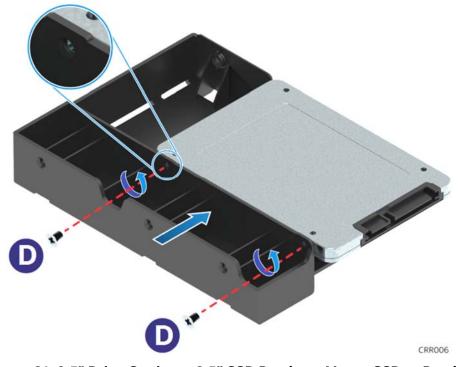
3.5" Drive Carrier to 2.5" SSD Bracket – Mount SSD to Bracket
